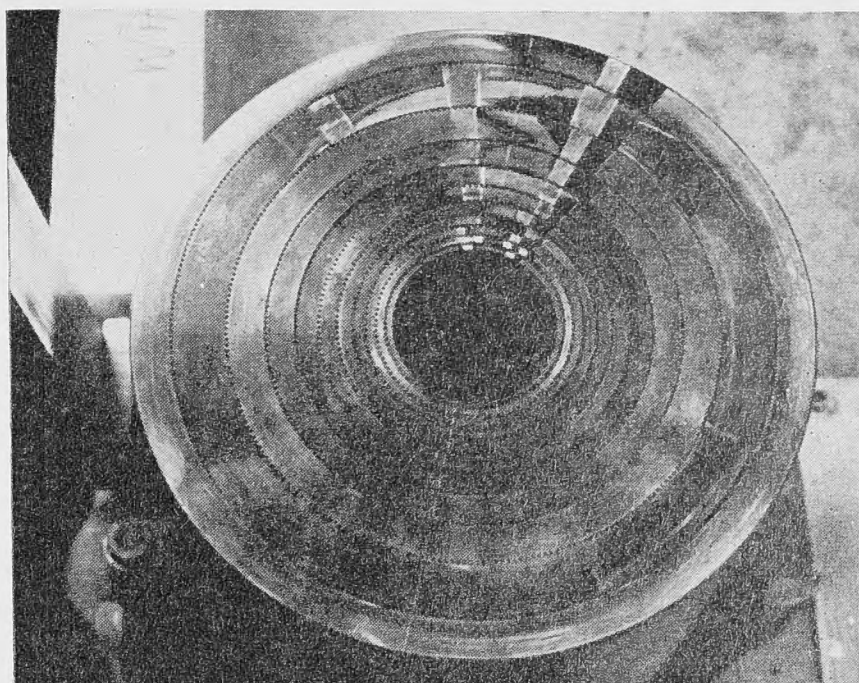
The eleven subcoils fitted together to form the inner solenoid. The dark areas evident on the top face of the solenoid are the bonding and insulating layers exposed by machining the ends of the subcoils. In places parts of the exposed layers can be seen to have been removed to enable contact rods to reach the underlying conductor
